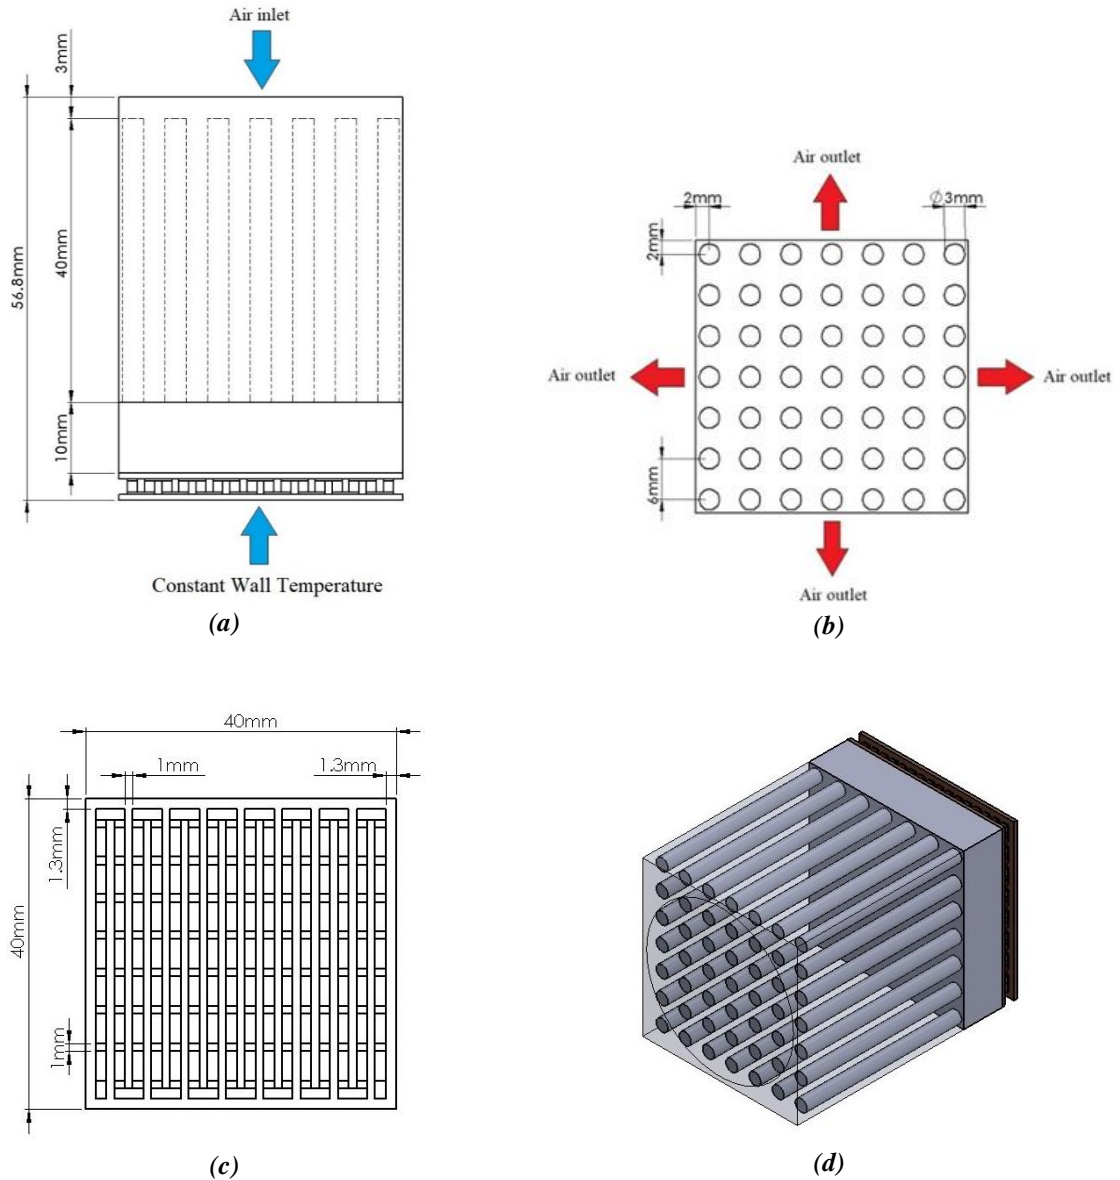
The schematic of the TE module system. (a) The front view of the TE module system. (b) The top view of the cylindrical pin-fin heat sink. (c) The inside view of the TE module. (d) The perspective view of the TE module system
